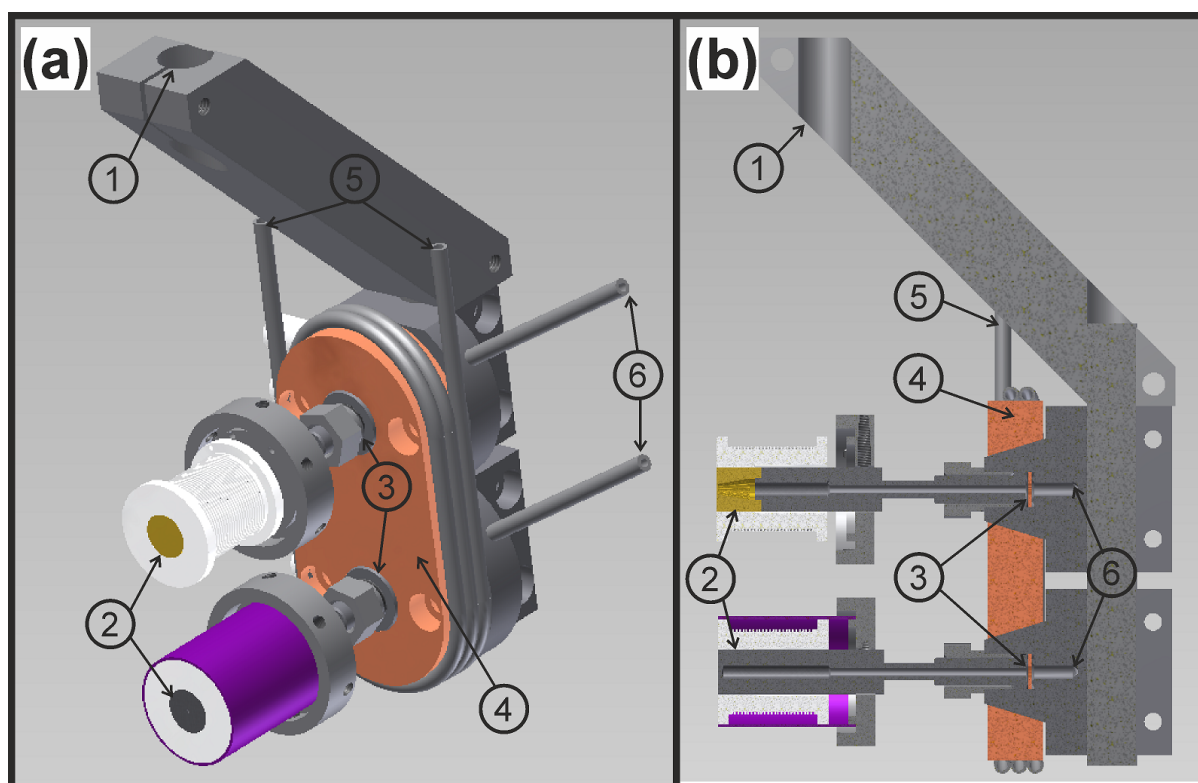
Inventor drawing of the sample holder. Panel (a) shows a perspective view, panel (b) a cross cut. The designations are the same in both panels: (1) marks the mount to the manipulator axis, (2) the sample and Knudsen cell assemblies. Those are fixed on the holder using seals with copper gaskets (3, Swagelok VCR[®] fitting, 1/8 inch \varnothing), which is also the connection to both gas supply lines (6). The cooling block (4, orange) was chilled by room temperature water flowing through a tube loop (5).
